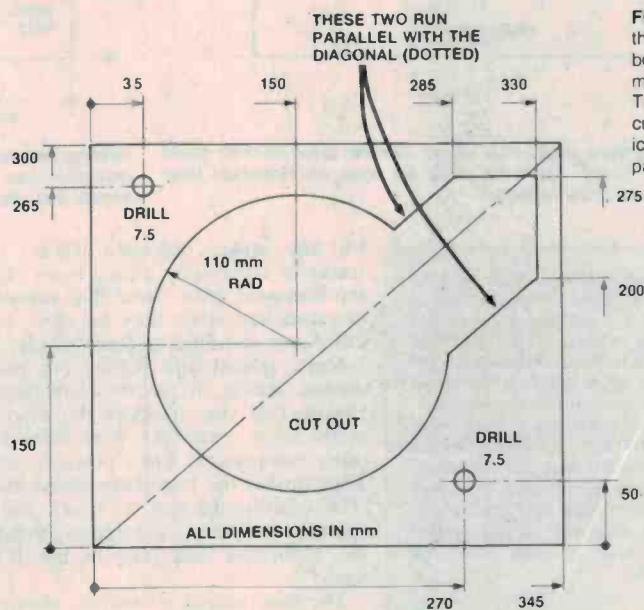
This shows the section which must be removed to accommodate the turntable. The top of the box is cut out of 10 mm particle board which is painted matt black.
